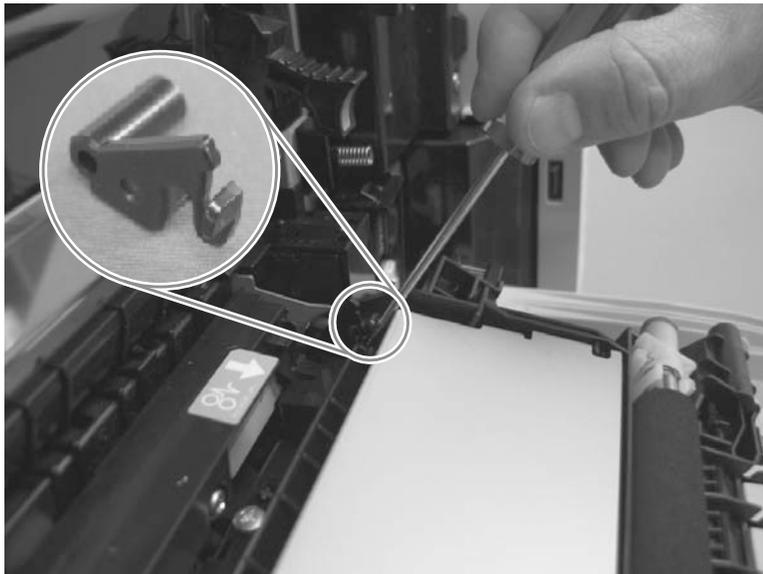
Remove the secondary transfer assembly (1 of 3)
